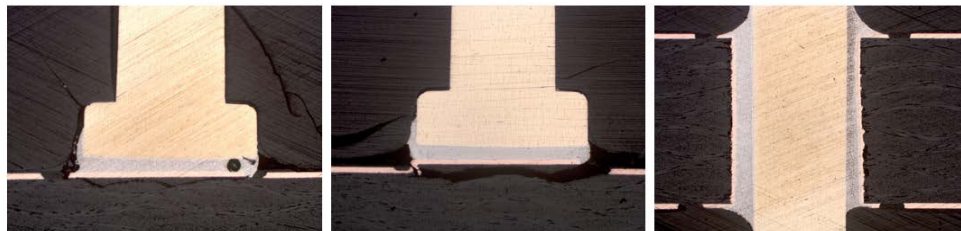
Specimen cycled at 45°C to -50°C thermal cycling showing cracking in the epoxy surrounding pins. Pad cratering in surface mount joints. Undamaged through-hole solder joints.
